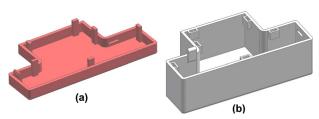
CAD drawing for the optimized DVD player model (solution 7): (a) top part and (b) base part
